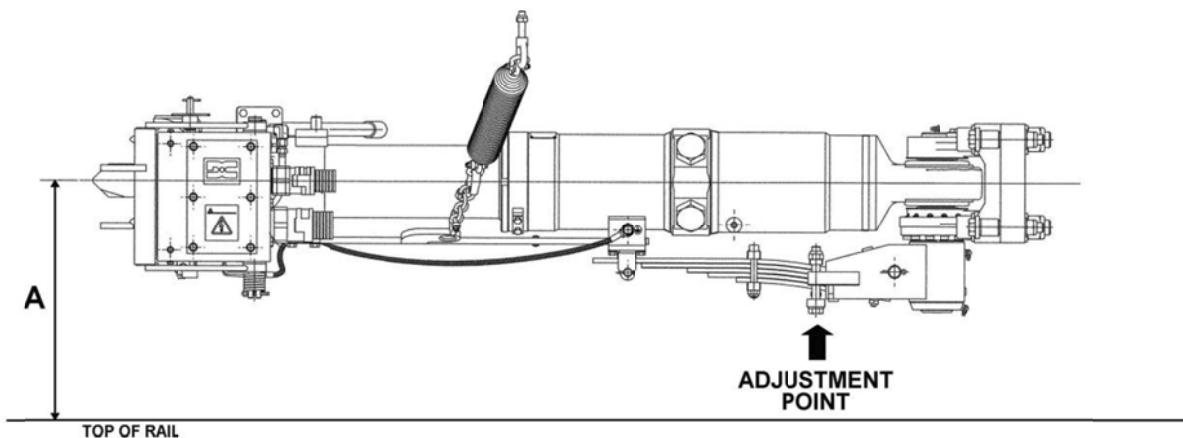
MECHANICAL COUPLER HEAD -DIMENSION "A" MEASURING
